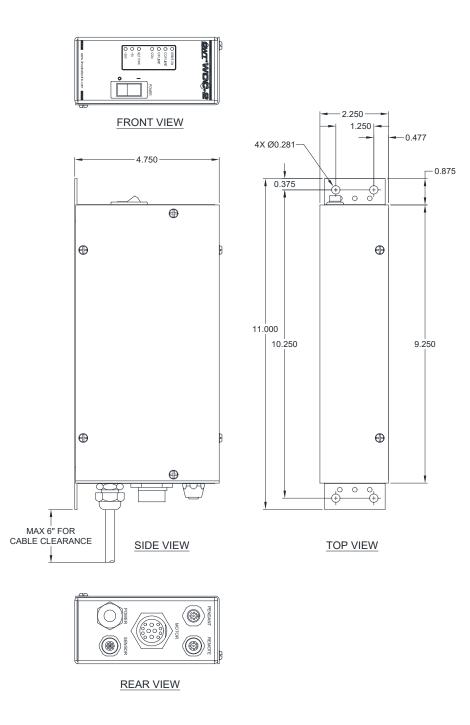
WOC-2 Control Enclosure Mounting Dimensions
